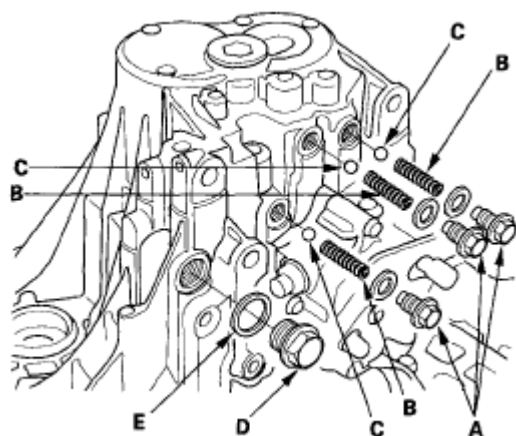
Identifying Detent Bolts, Springs And Steel Balls
